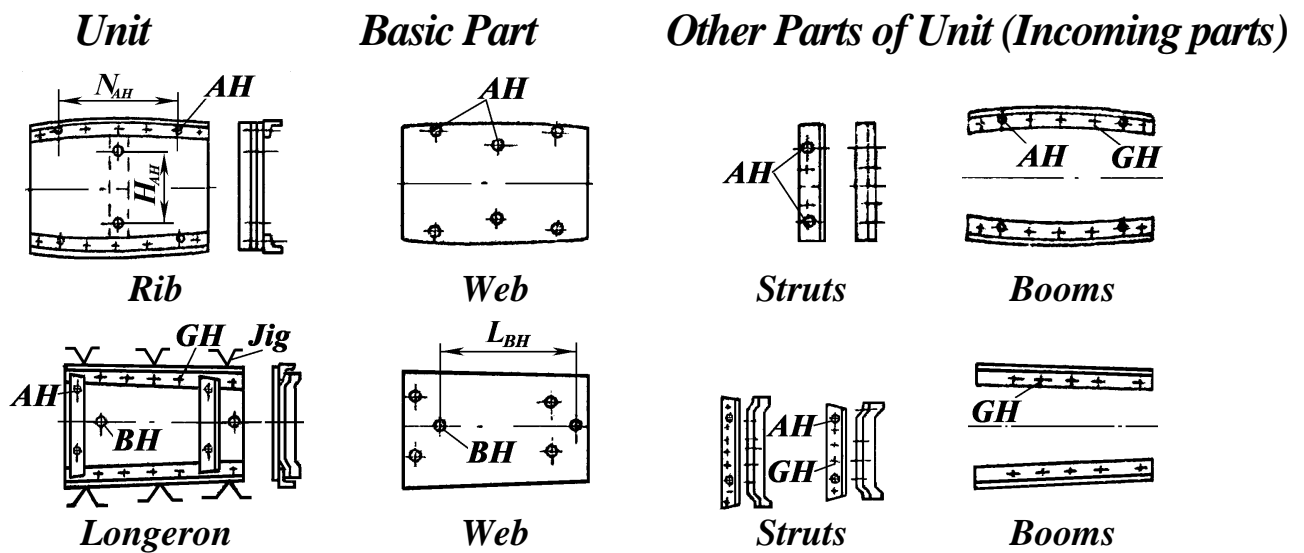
Locating during unit assembling and conditions of parts supply for assembling by the AH and in the jig
